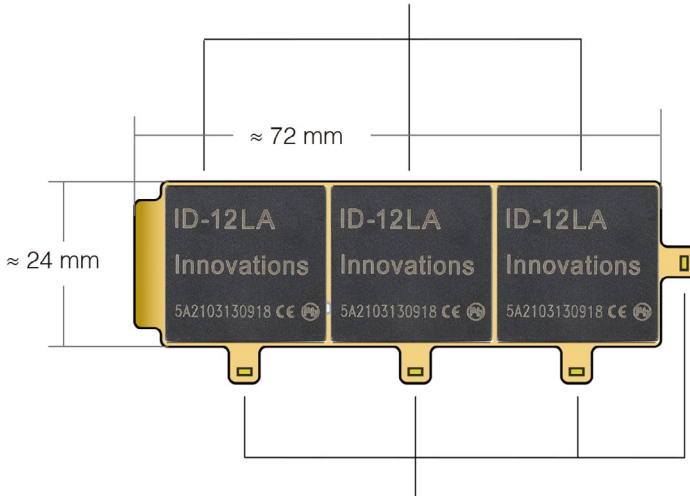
Arrangement of chips on the first PCB and its possible dimension.
